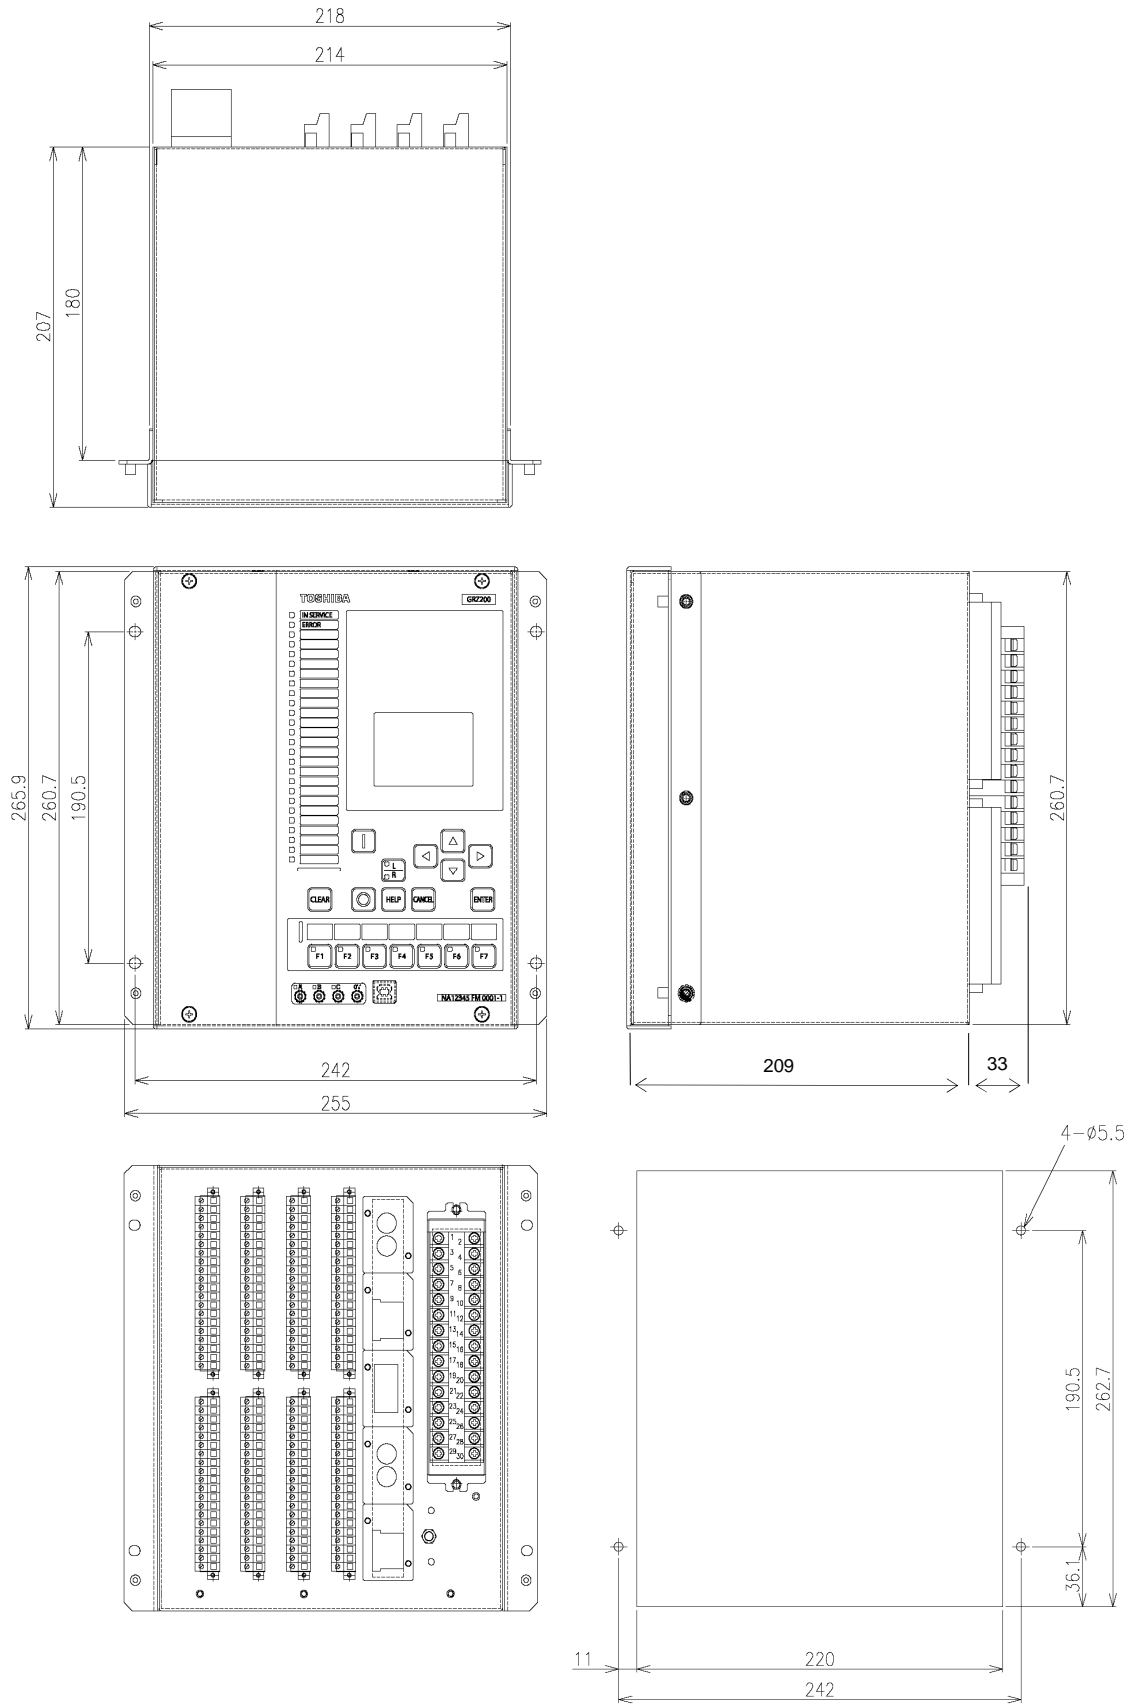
Dimension and Panel Cut-out – 1/2 x 19” case size
